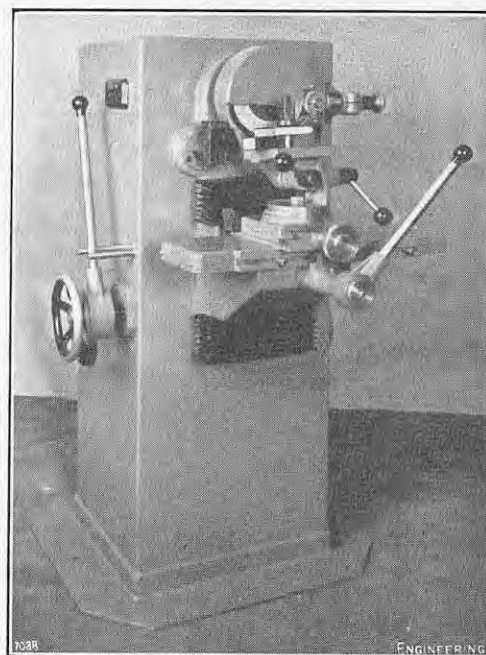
MACHINE FOR GRINDING CHIP GROOVES
